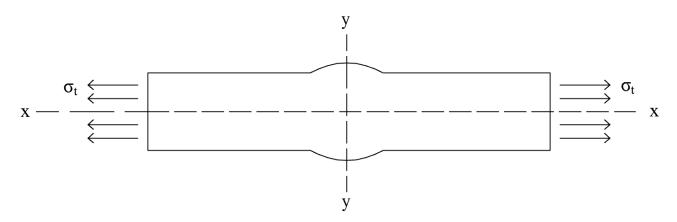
External loading is applied axially and remotely from weld.
